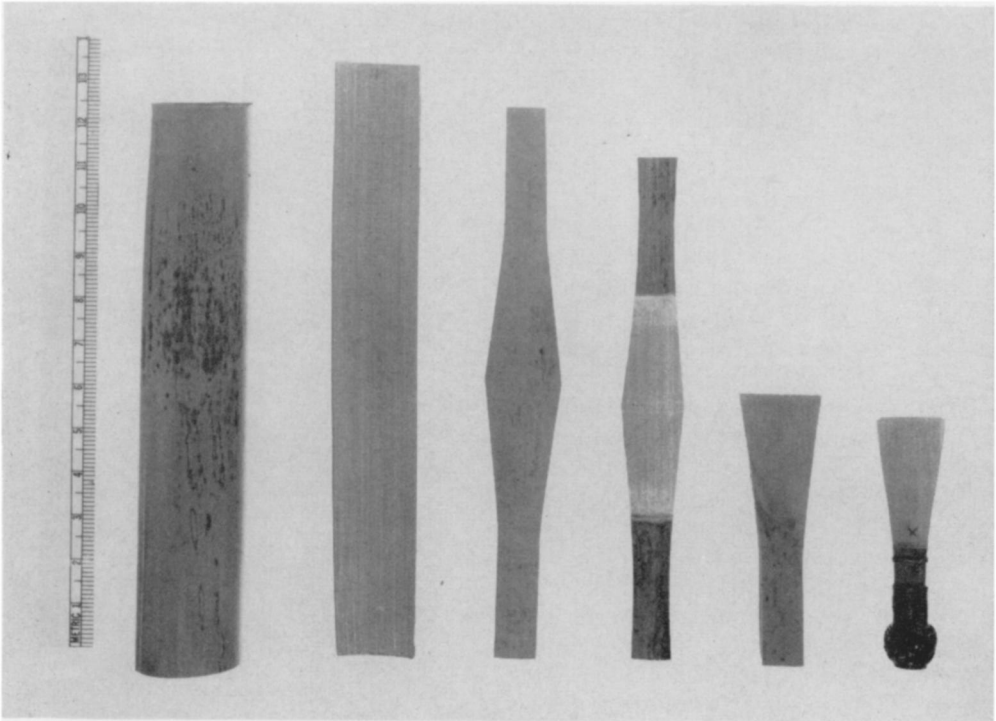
Stages in the preparation of bassoon reeds. From left to right: cane tube, trimmed and gouged cane section, gouged surface showing; shaped gouged-cane; shaped gouged-cane with blade partly cut; folded cane with blade partly cut; completed reed. (U.S.D.A. Photo, cane courtesy of Jack Spratt)
